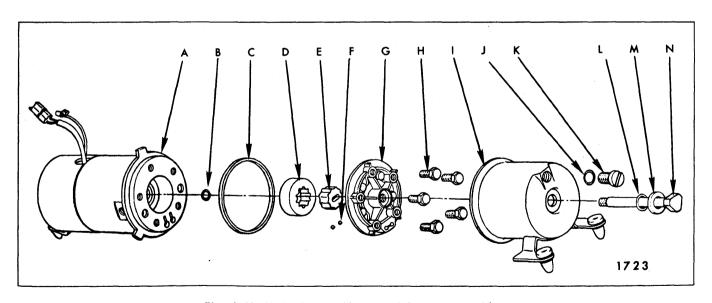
Hydro-Lectric Motor And Pump Disassembled
